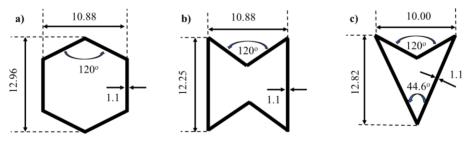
Dimensions of unit cell geometries: a) honeycomb, b) re-entrant, c) double arrowhead
